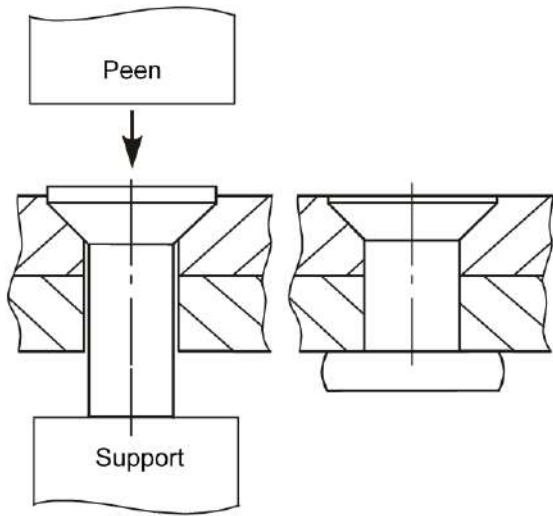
Shaping riveted joint of thin skins using rivets by AHY 0314
